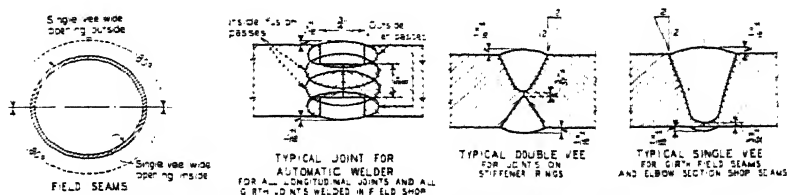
Details of various types of welds used in Norris penstocks.
